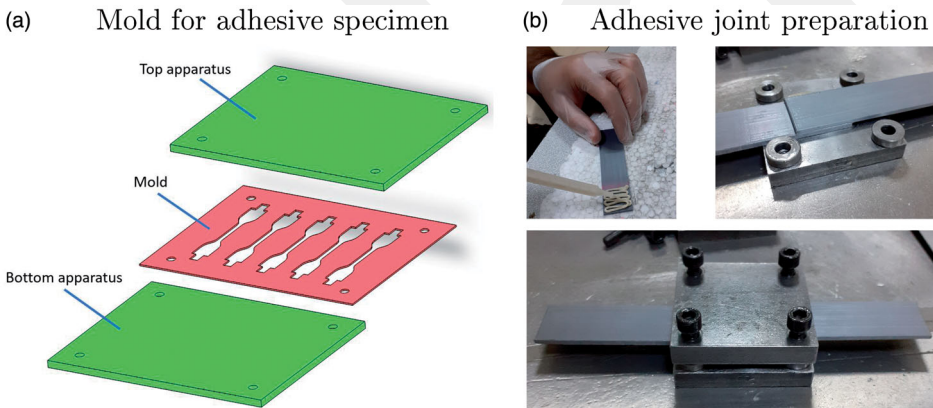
(a) Mold for adhesive specimen and (b) preparation of 3D-printed PLA adhesive single-lap joint.
